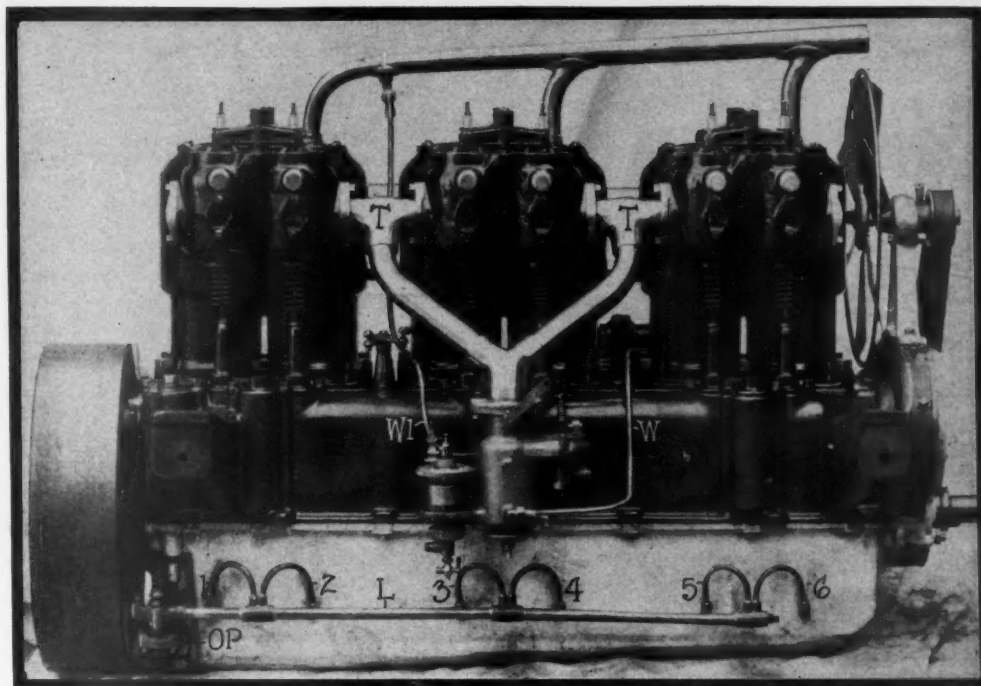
CARBURETER SIDE OF PREMIER MOTOR SHOWING STROMBERG CARBURETER, WITH HOT WATER CONNECTIONS W AND W1, AND ALSO THE UNIONS T BETWEEN THE CYLINDER CASTINGS, THUS DOING AWAY WITH A LARGE MANIFOLD
